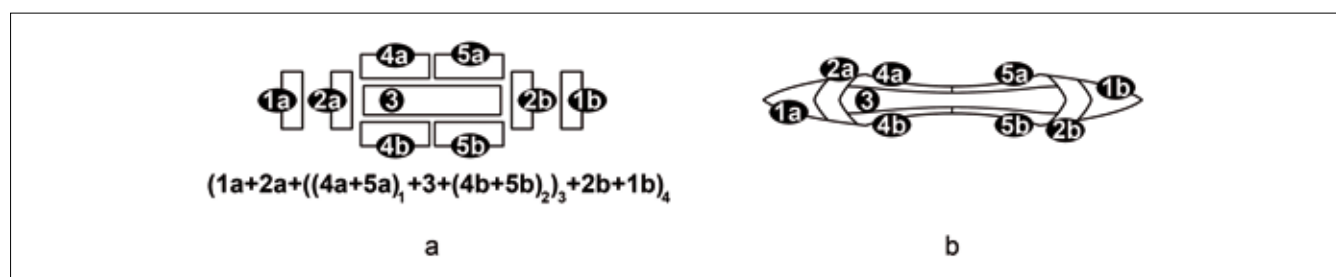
The blade manufacturing scheme: assumed assembly and welding of the initial billet (left); typical appearance of the finished blade in cross-section (right) (drawing: J. Hošek)
